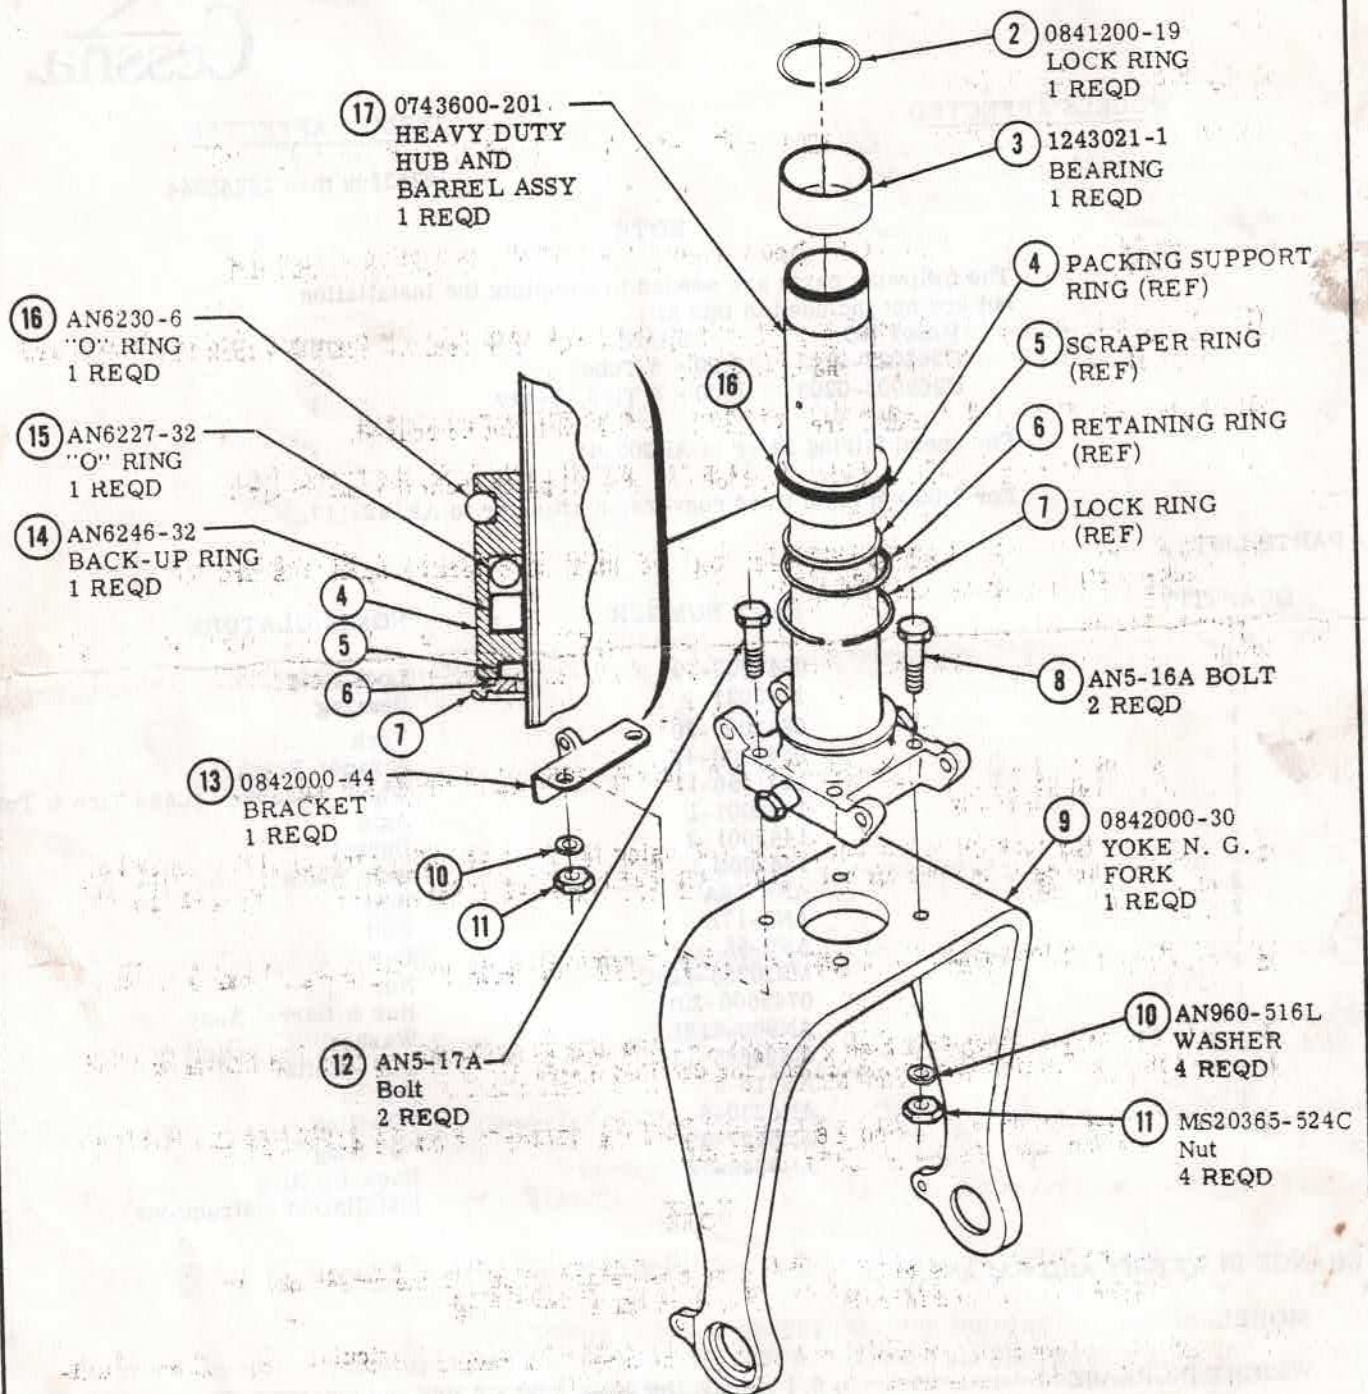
Heavy Duty Nose Wheel, Fork and Barrel Assembly
